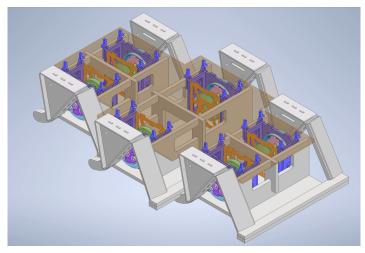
Current draft for FastAnt chassis design including a gearbox assembly for each leg.
